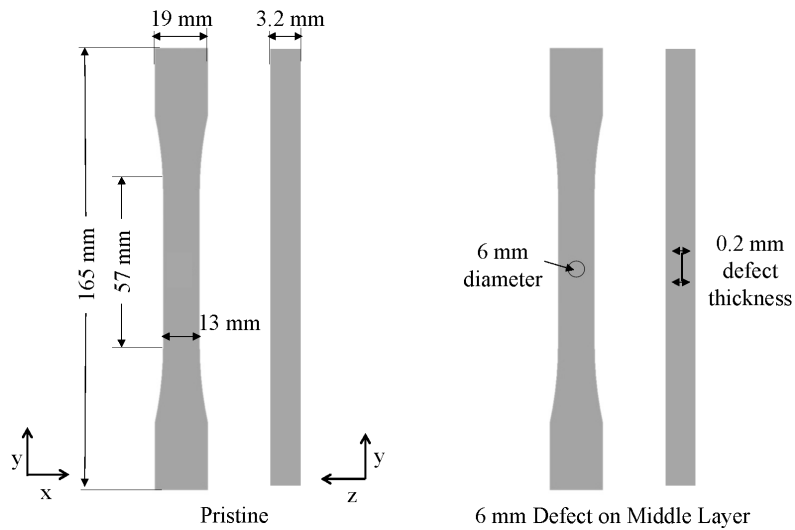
ASTM D638 Type I Standard Specimen containing 20% CF and 80% ABS materials: pristine specimen (left), defect specimen (right)
